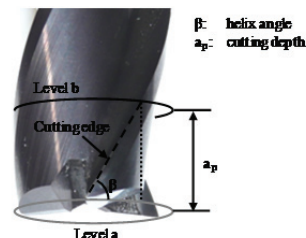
Experimental milling tool (Co. HAM Tools GmbH - Type 434; diameter $d = 16$ mm; helix angle $\beta = 30^\circ$; chamfer $b = 0.1$ mm)
